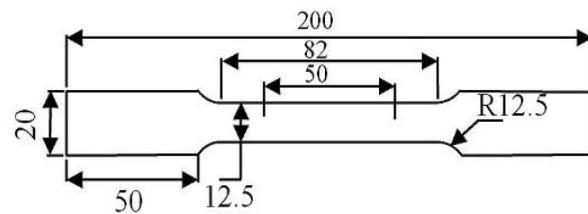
Dimensions of uniaxial tensile test specimens (mm) [14].
